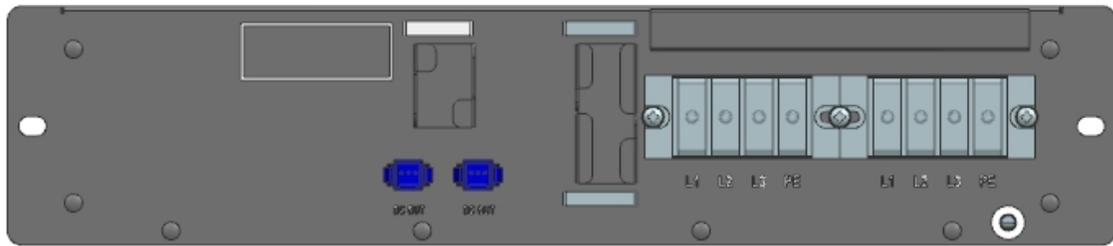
Front View of SMPS Assembly Type B, 3-Phase Input
